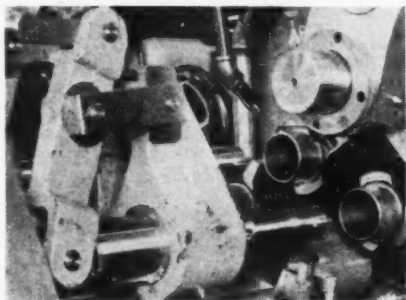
Special Accelerating Attachment. Hold back bracket stops top of lever. Forward action of main tool slide transmitted through the boring bar spindle mounting and linkage to lever accelerates motion of boring spindle to a faster feed per revolution than that of the main tool slide.
